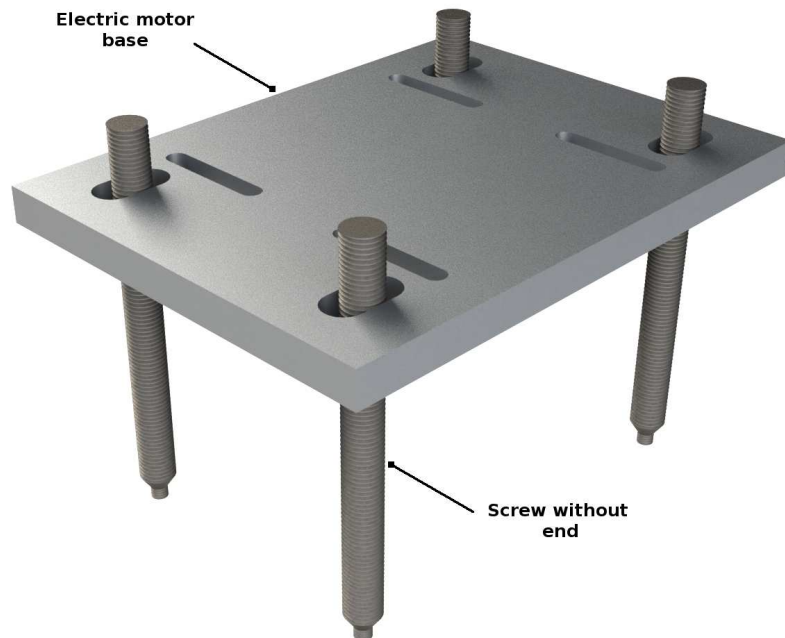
Isometric view of the leveling mechanism of the reductor and the electric motor.
